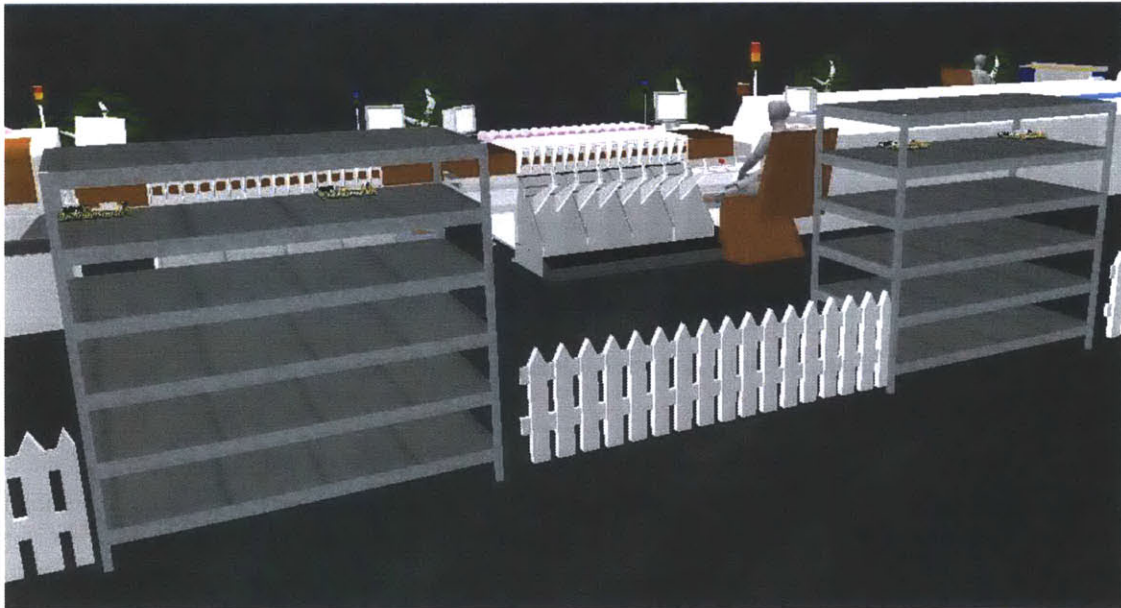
Machine loading racks and equipment CAD files (SMT PP2 and its buffer can be seen)
